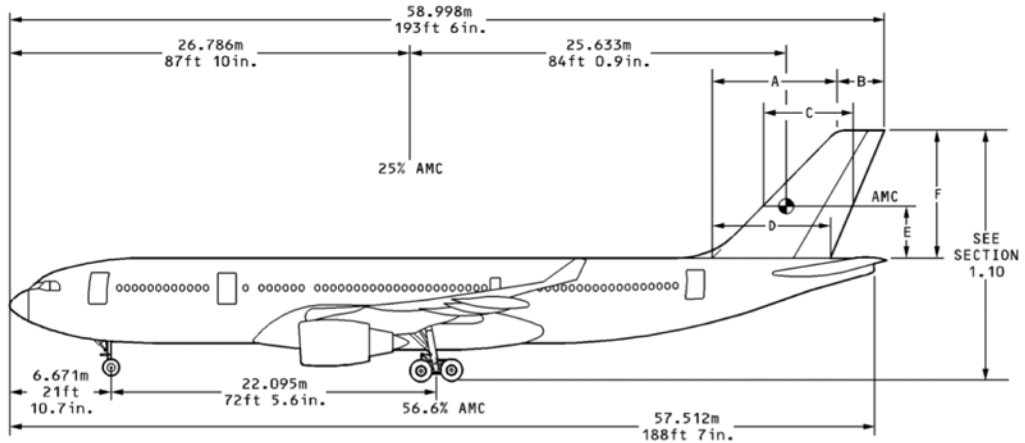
Aircraft A330-200 side-view dimensions, Airbus [3]
